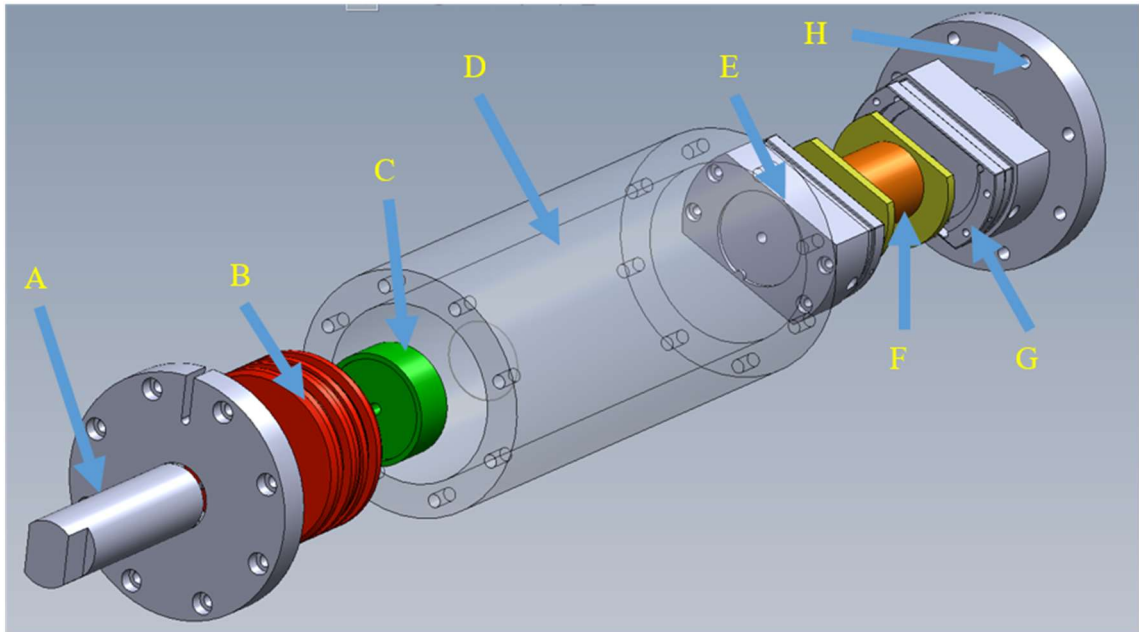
Exploded assembly view of the spine loading rig. A – displacement-controlled load apply on a screw base; B – rotation eliminator that avoids any rotational force during the load apply; C – connector that connects the load cell with the sample pot; D, rig transparent tube; E, sample pot 1; F, sample under investigation; G, sample pot 2 that attaches to the rig base; H, rig base.
